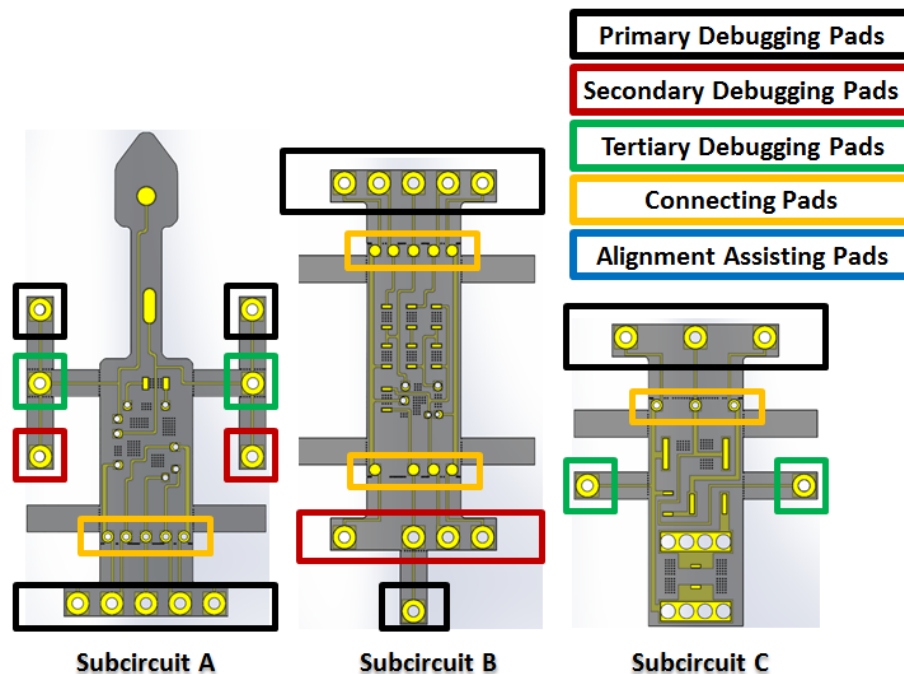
Design of three-level debugging pads, the connecting pads and the alignment assisting pads.
